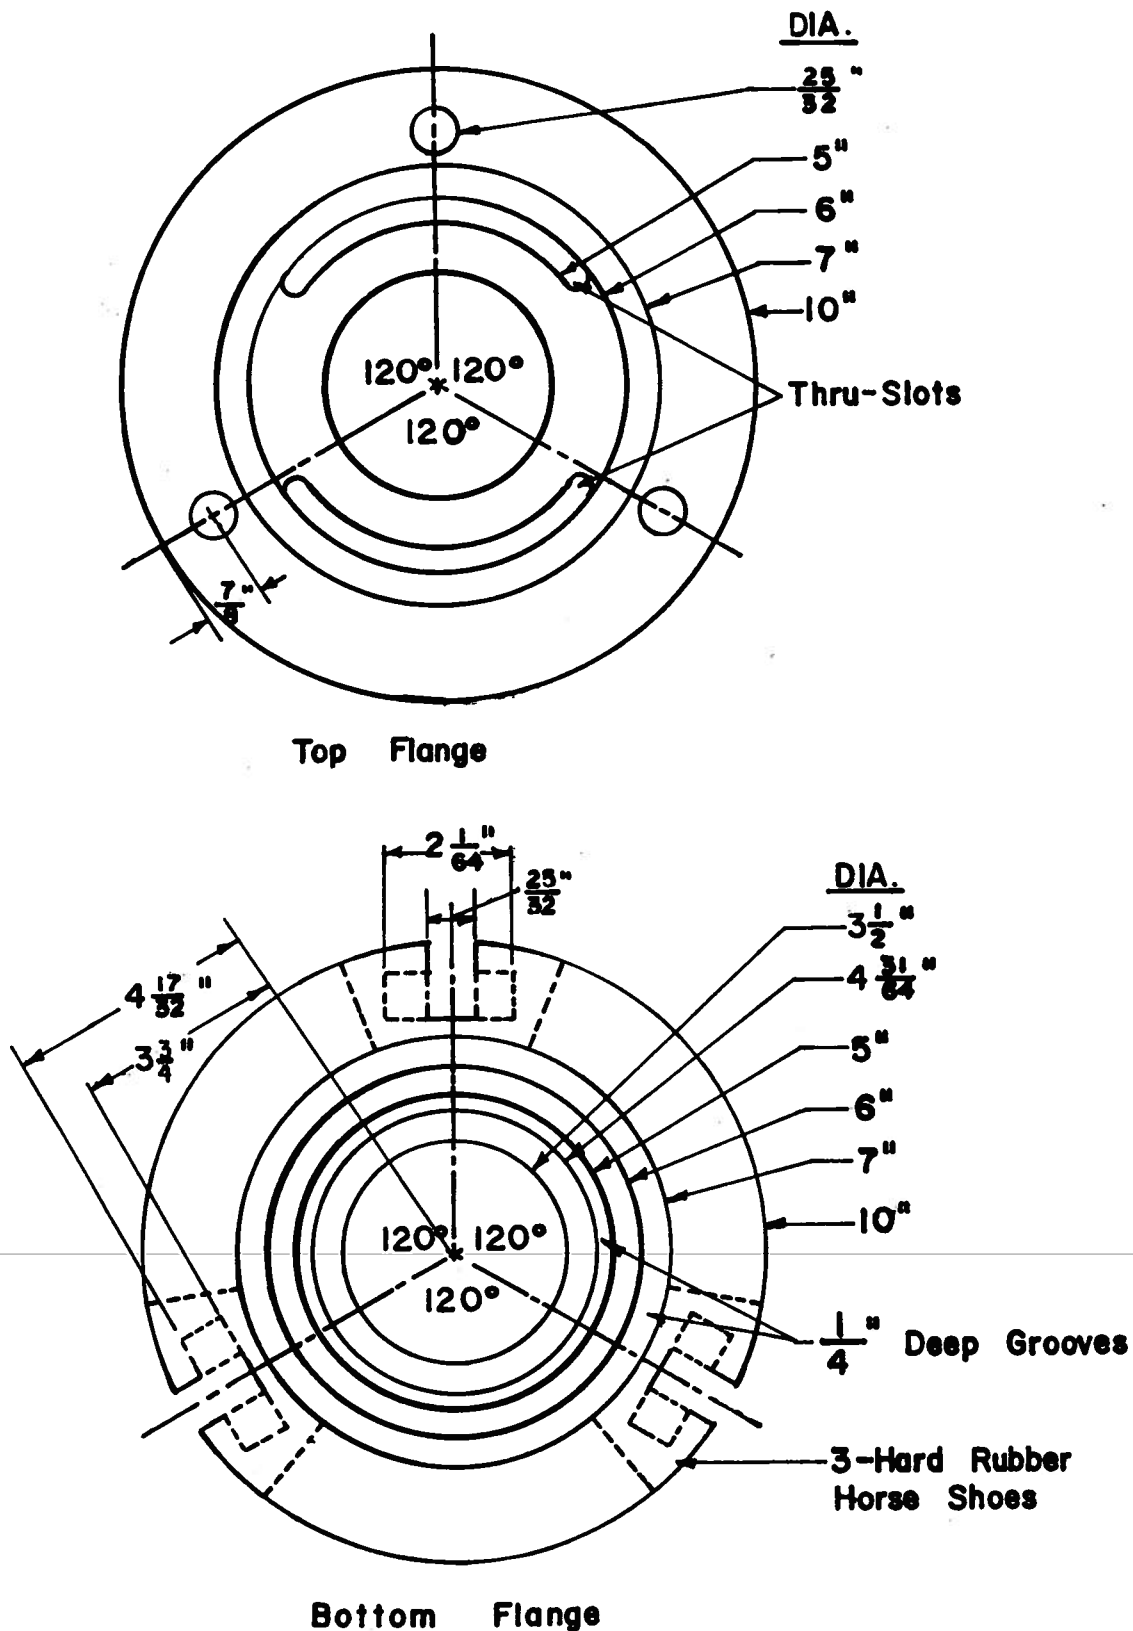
b DETAILS OF TOP AND BOTTOM FLANGES OF CASTING MOLD
